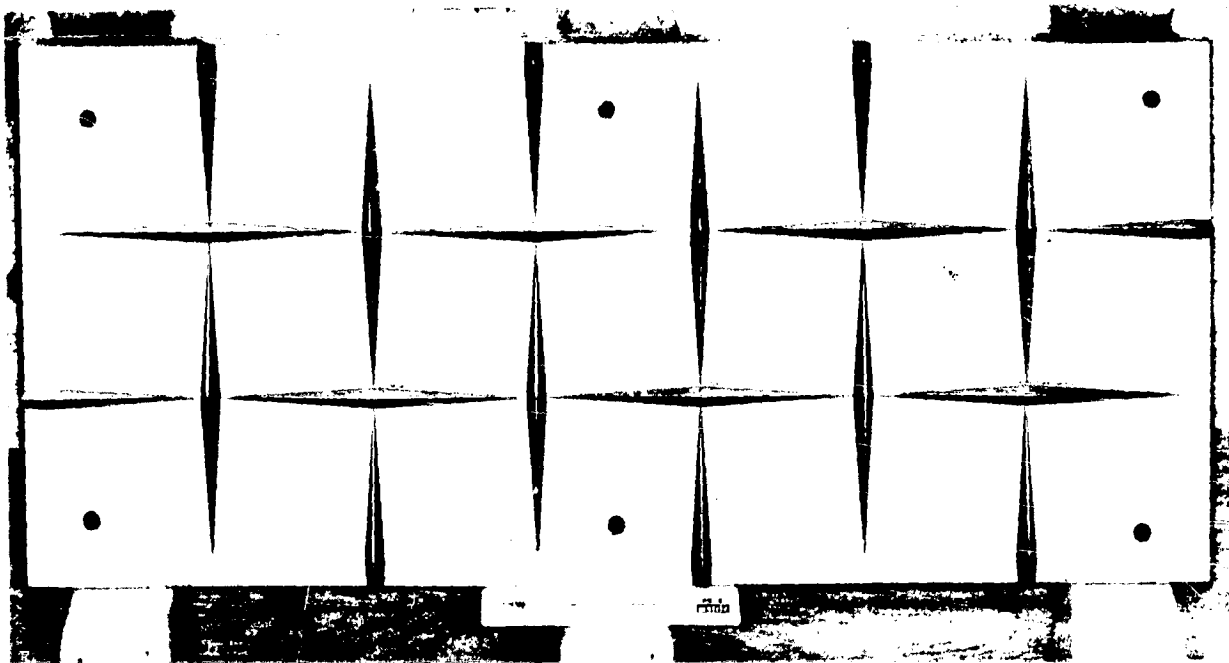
Flat Male Metal Die for Vacuum Jacket Forming
